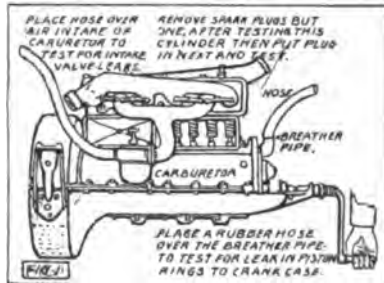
To test for intake valve and piston ring leaks—a suggestion.
